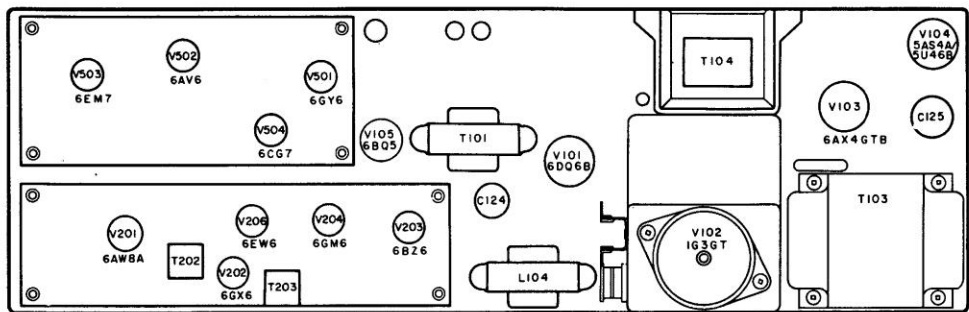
CHASSIS LAYOUT — TOP VIEW — SHOWING COMPONENTS
